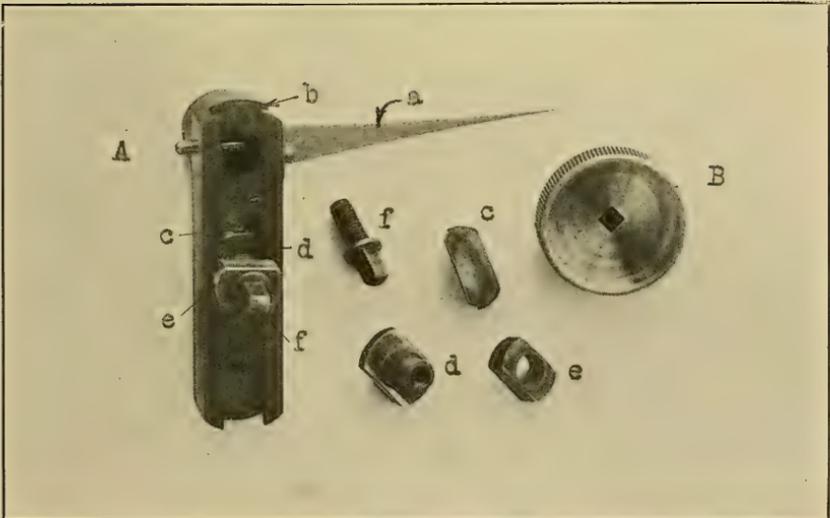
DETAILS OF COMPONENT CRANKS, TIDE-PREDICTING MACHINE.
